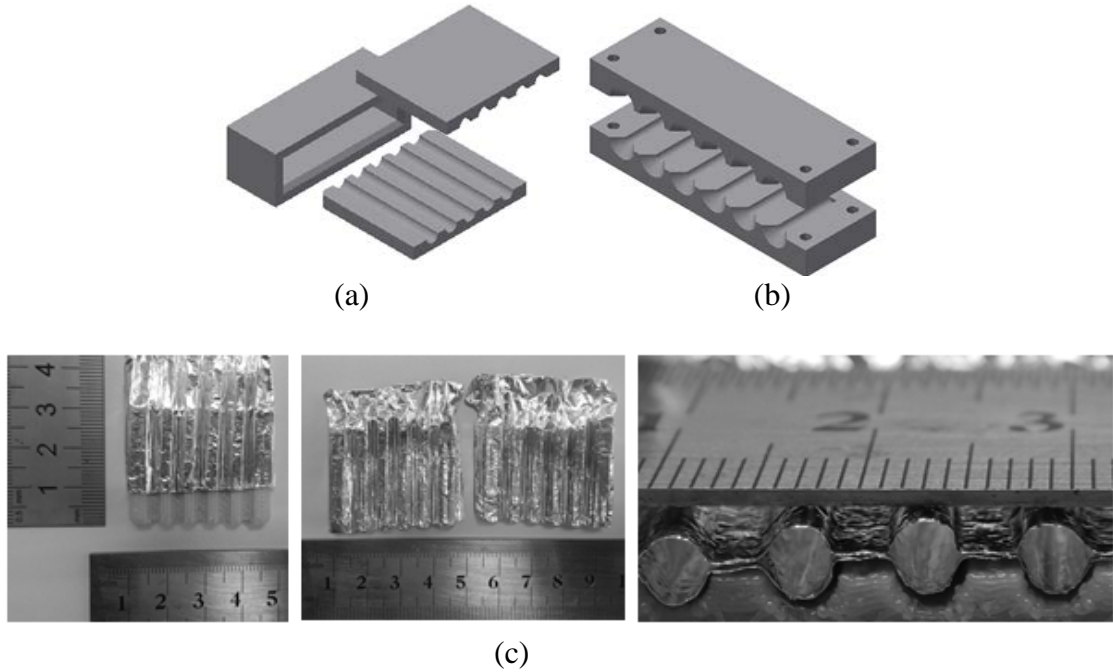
Two designs of mould that use aluminium foil to ease removal of moulded part (a) 2-piece Al mould with end-cover (b) 2-piece mould incorporating end cover, and (c) Al sheet on the fabricated mould with top view and assembled front view.
